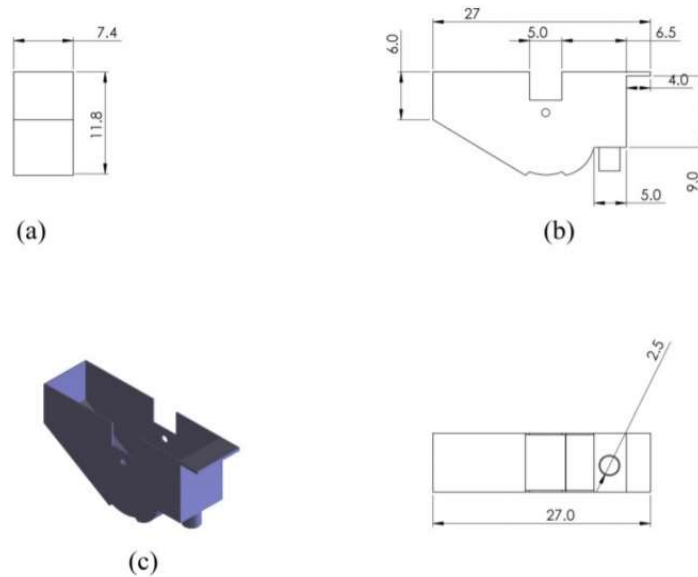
a) & b) Side view of seed rotor cover box c) Isometric view
